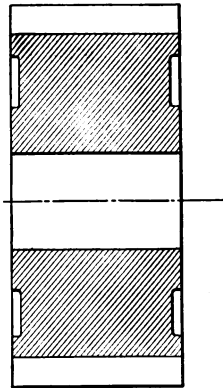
Ends of Cutter Recessed to Save Grinding more than Actual Hubs
